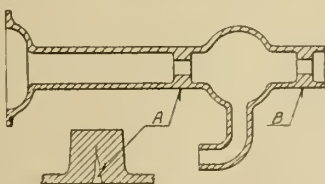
CASTING WHICH HAD DEFECT AT A.
